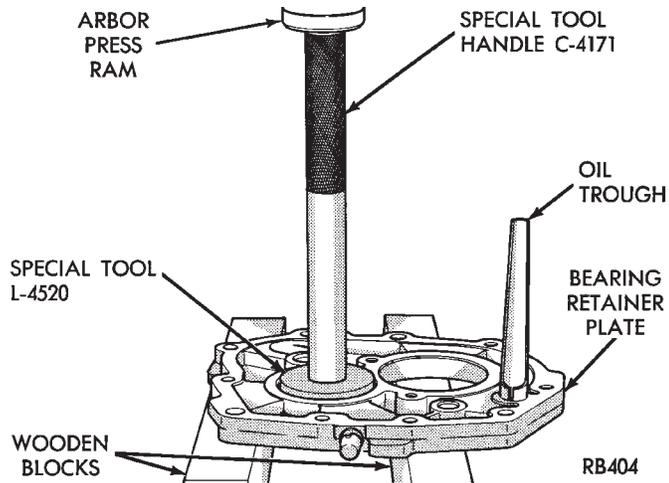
Install Input Shaft Rear Bearing Cone
